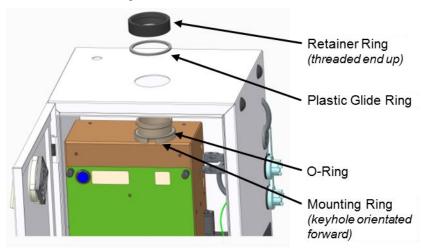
Install DustTrak Monitor – insert inlet ring up through opening
